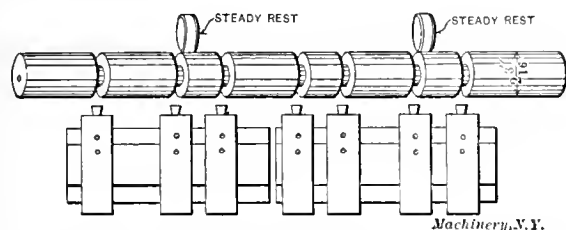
First Operation in Turning Cam-shafts on the "Lo-Swing" Lathe
